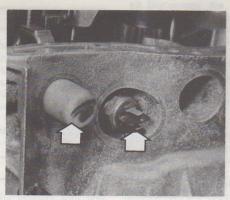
Typical tool for locking the input shaft on the 4-speed gearbox (Sec 7)
